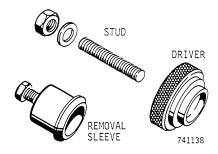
D62920 Tool Kit for Timing Gear Cover Seal Removal and Installation
